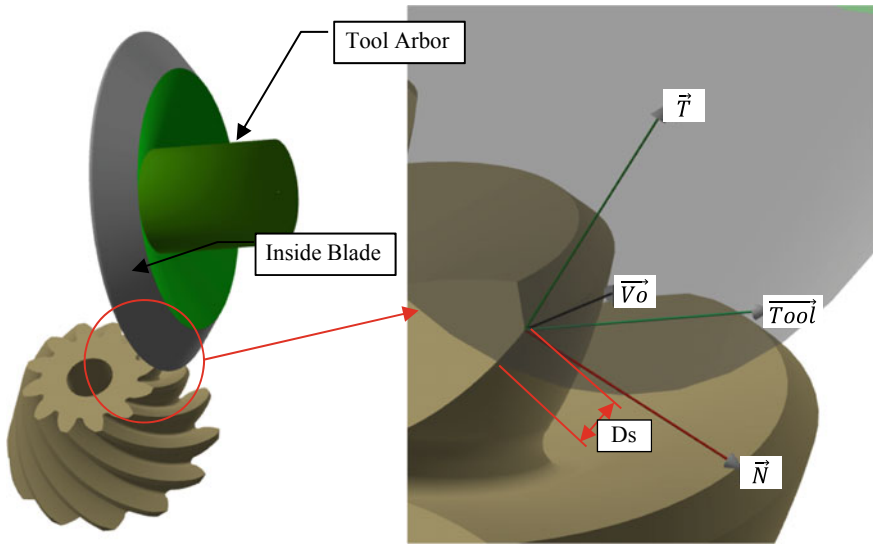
CoSIMT Tool installation for Tip chamfering—spiral bevel gears
